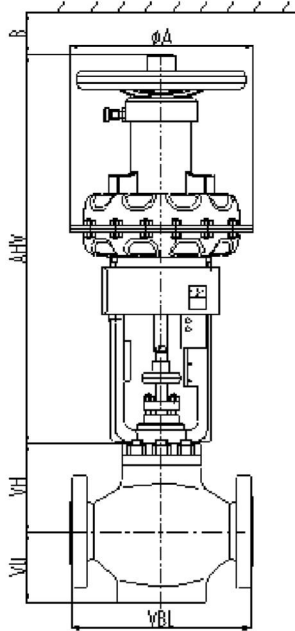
Overall drawing with side mounted handwheel for DN80-DN200(3"-8")(Only MF2,MF3)
